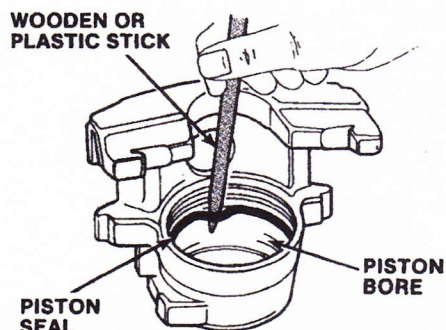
Removing piston seal with a wooden or plastic stick.
